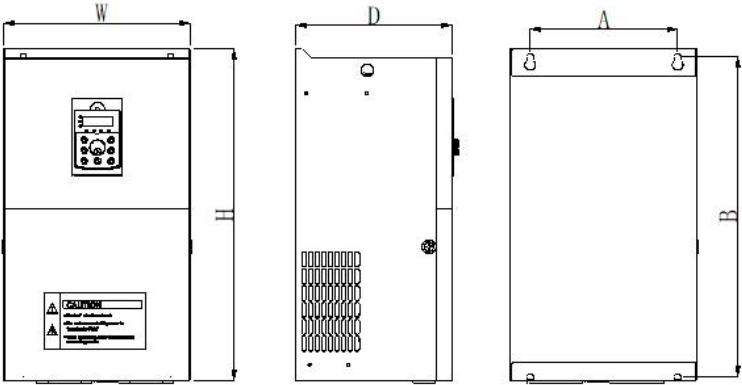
V (4T) 45-132kW VFD external dimensions and installation dimensions diagram
